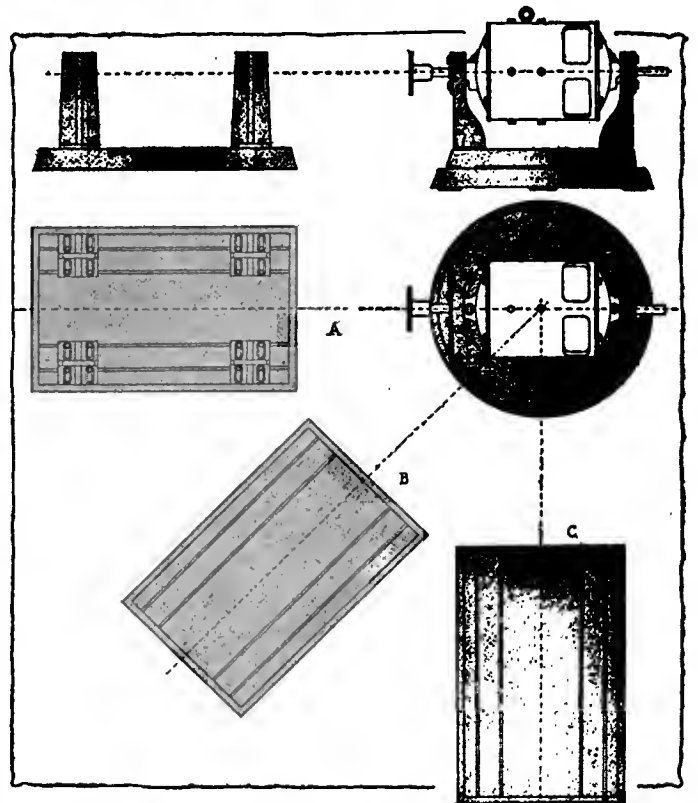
Upper—Side elevation of bed plate for mounting motor in laboratory testing plant and dynamometer, showing alignment
